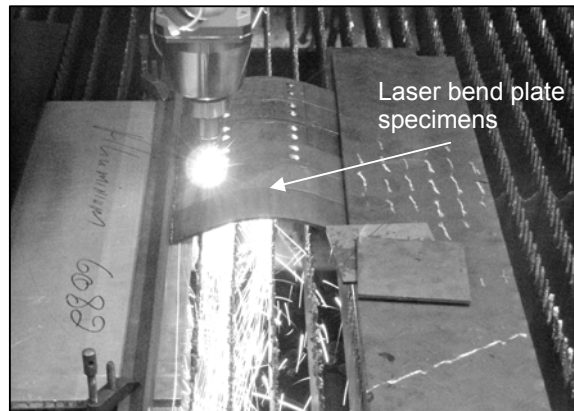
Cutting of fatigue specimens from laser formed plate
